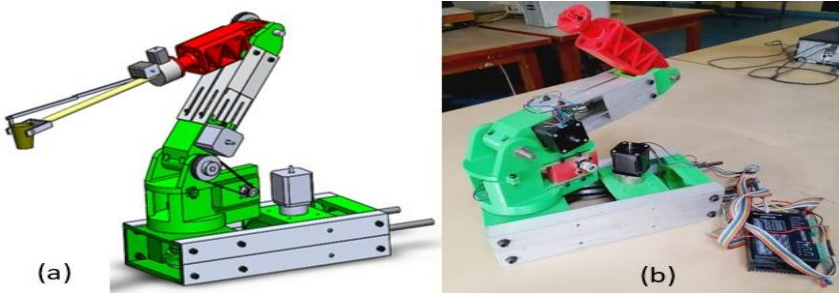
Three-link robotic manipulator (a) CAD model (b) fabricated robot
